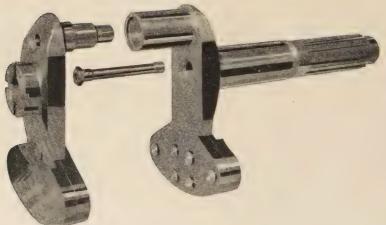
Pratt & Whitney "Wasp" crankshaft and connecting rod assembly.
